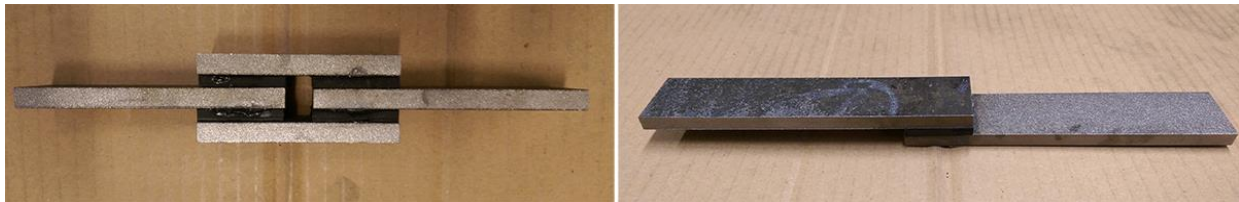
Fabricated specimens for shear bond test (left) and adhesive shear strength test (right)
